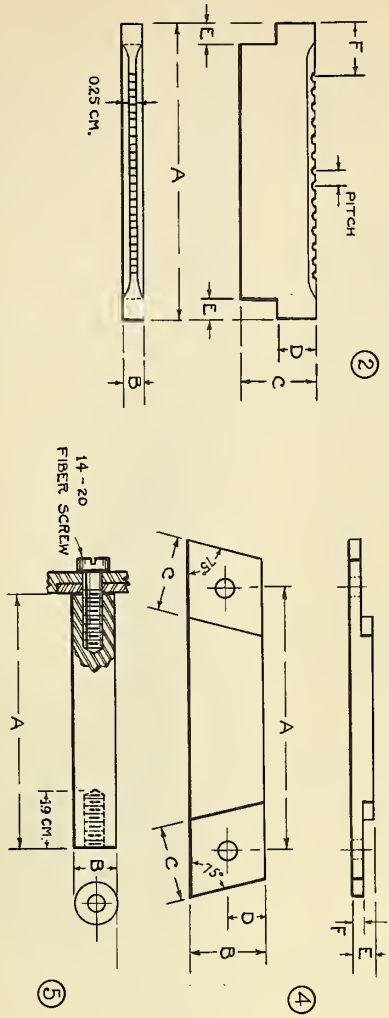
WORKING DIMENSIONS FOR PARTS OF INDUCTANCE COIL FRAMEWORKS.
